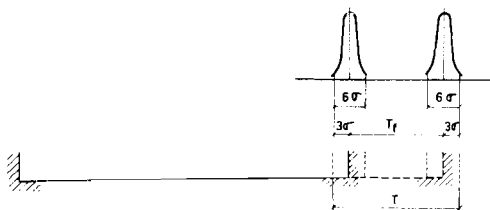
Tolerance of components from a mould having a tolerance of dimension.
